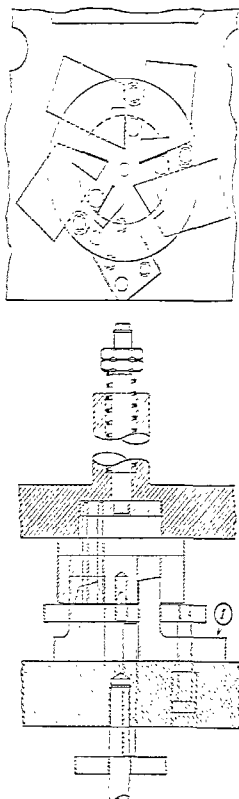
Combination shear and forming die for fine-blade fan made from 0.015-in. steel. (Hardy Mfg. Corp.)
